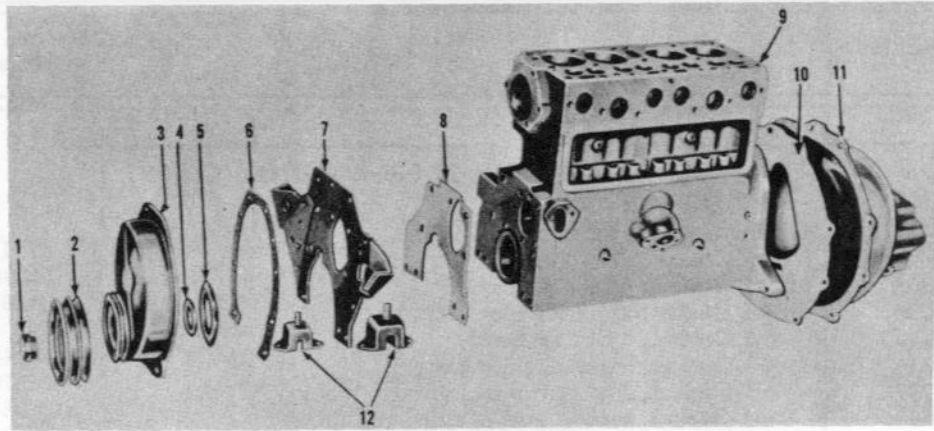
CYLINDER BLOCK, FLYWHEEL HSG.
